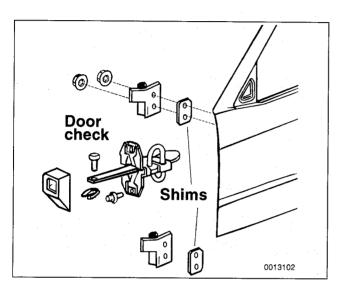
Door hinge and door check components. Front and rear doors are similar.
